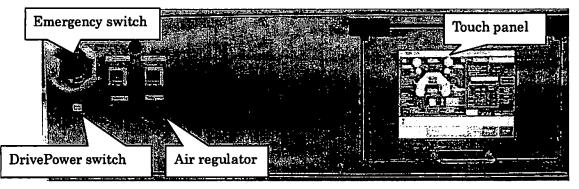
Main Operation Panel on Machine Front
